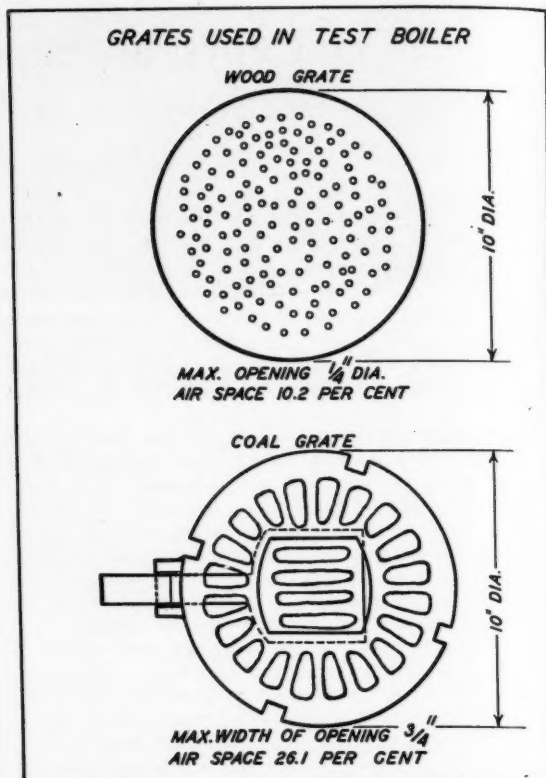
(RIGHT) GRATES USED IN THE TEST BOILER
